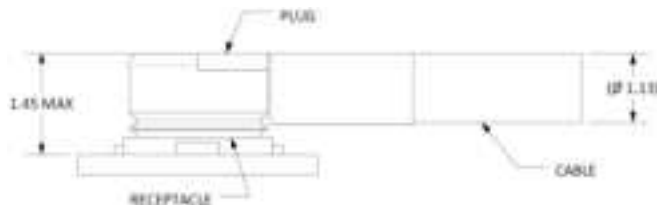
Connection between RF Connector and Mating Plug Using $\varnothing 1.13$ mm Coaxial Cable
